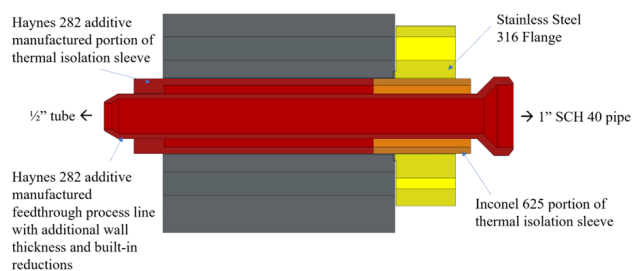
Hot side process line feedthrough assembly using additive manufactured solution. Colors for material transition emphasis (red: additive manufactured Haynes 282, orange: Inconel 625, yellow: Stainless Steel 316).
